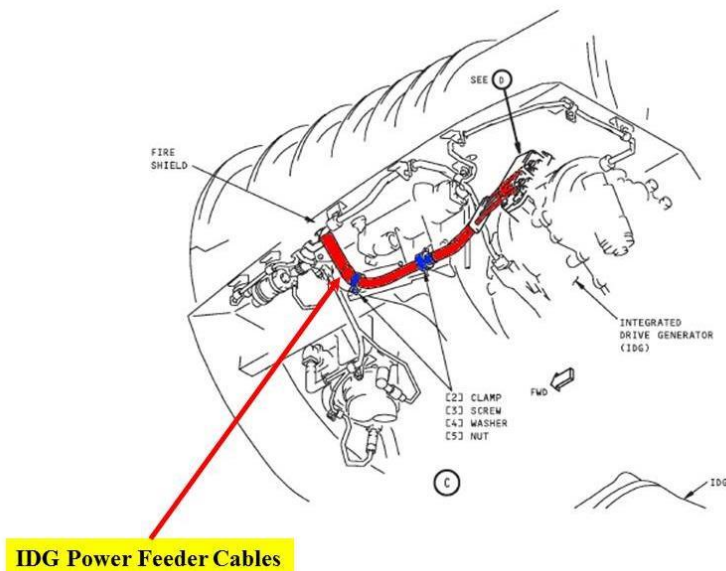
TYPICAL ILLUSTRATION OF IDG POWER FEEDER CABLE ROUTING BELOW ENGINE HEATSHIELD IN THE BOEING 767 MANUALS
